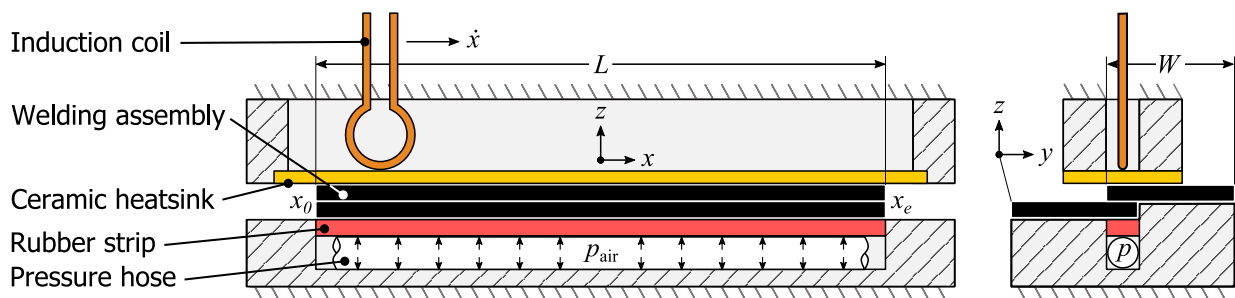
A schematic overview of the induction welding coil against an electromagnetically transparent heatsink close to the workpiece (source: TPRC).
